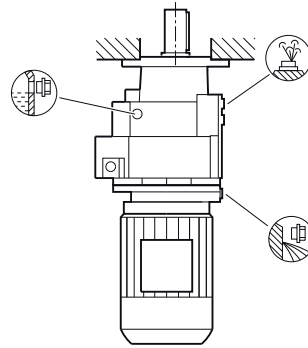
Mounting positions for helical gearbox DF/ZF flange-mounted design and DZ/ZZ with housing flange, sizes 19 - 29
